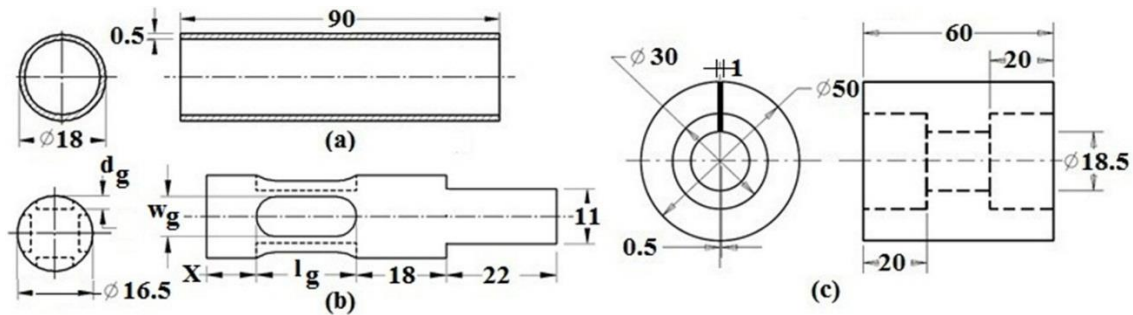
2 Geometrical shape and dimensions of (a) tube (b) rod and (c) single-stepped field-shaper (All dimensions are in mm)
